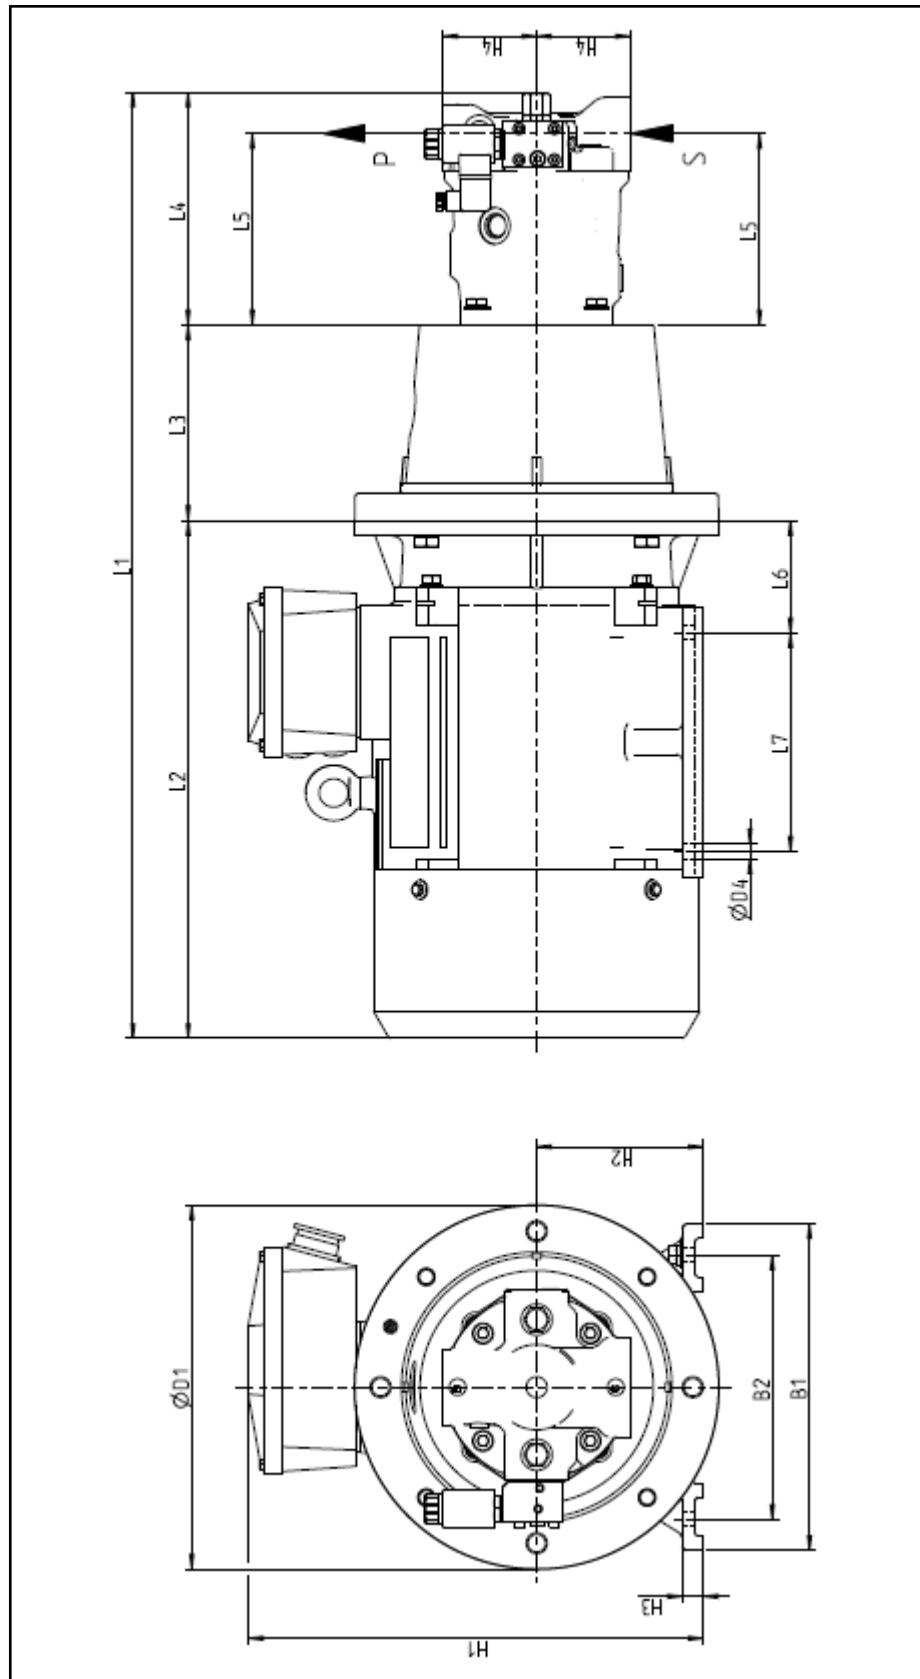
Dimension sheet "MPES2" with "A10VZO" in the fastening mode "A" (horizontal foot fastening)
